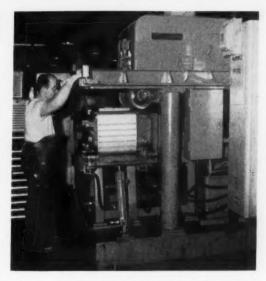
This welder takes α flat sheet, folds it up to form the bottom and sides of the oven and then seam welds the top panel in place with two series seam welds.
